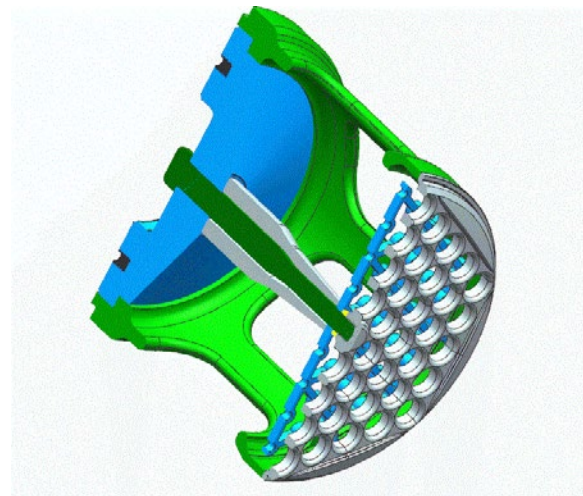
Valve seat bolted to valve cage resulting in higher stiffness of discharge valve seat
